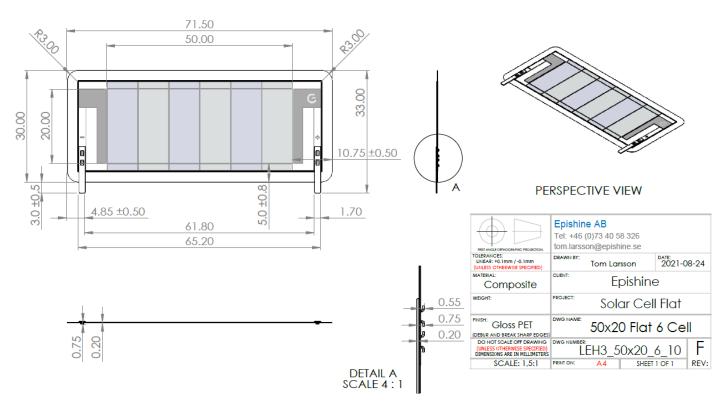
LEH3_50x20_6_10 module drawing and tolerances
